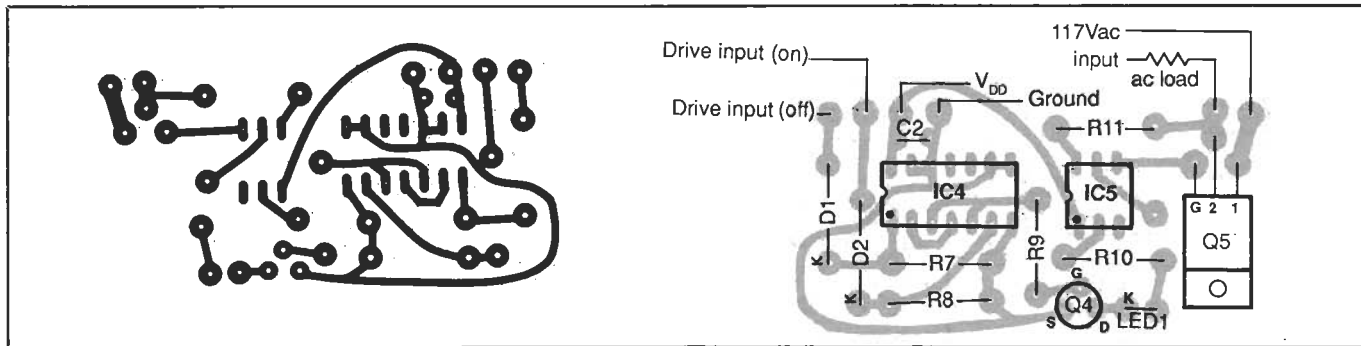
Actual-size etching-and-drilling guide (left) and wiring diagram (right) for pc board used to assemble Fig. 8 circuit.
